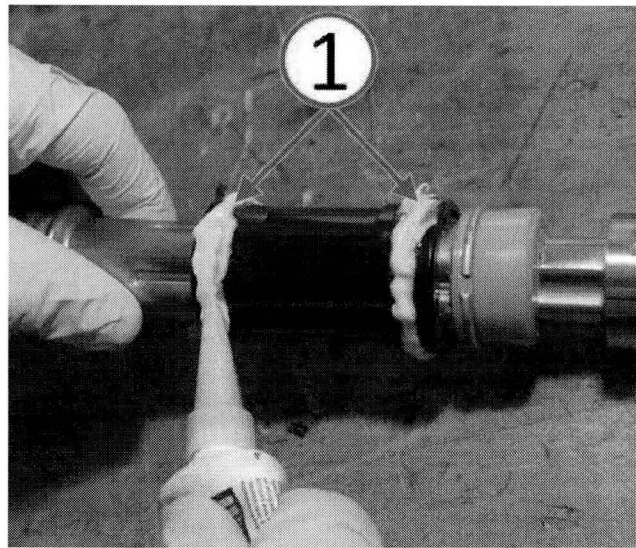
Apply White Lithium To Inner Bearing Sleeve
